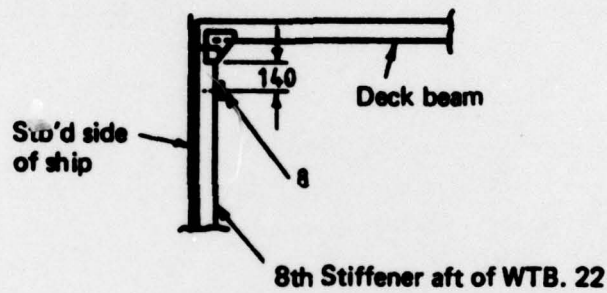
LINEAR GAUGE No. 8 ON EDGE OF STIFFENER No. 8 AFT OF WT.B. 22
